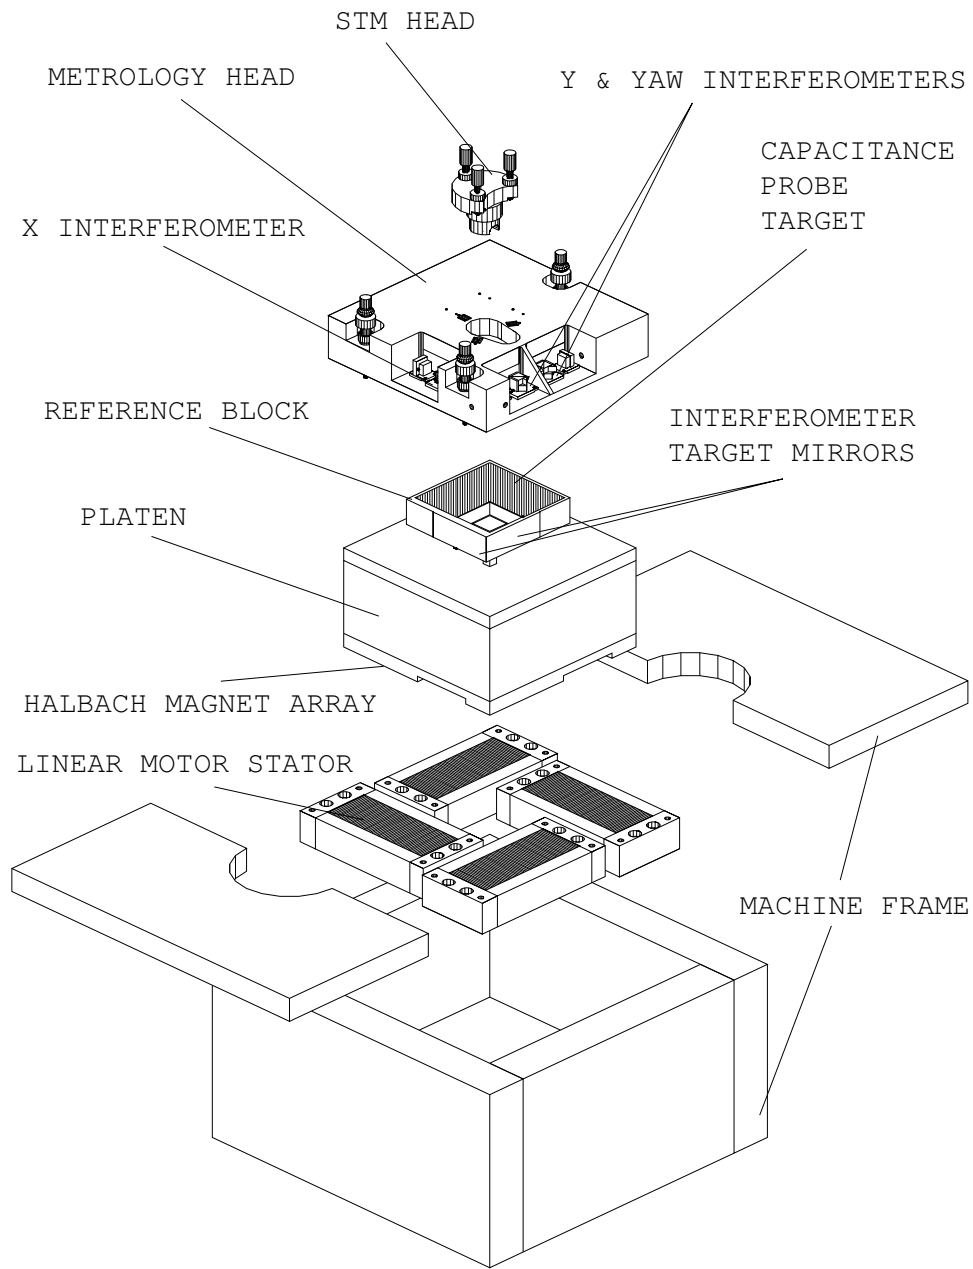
Exploded view of the LORS Stage. This drawing is taken from Michael Holmes' doctoral thesis [18].
